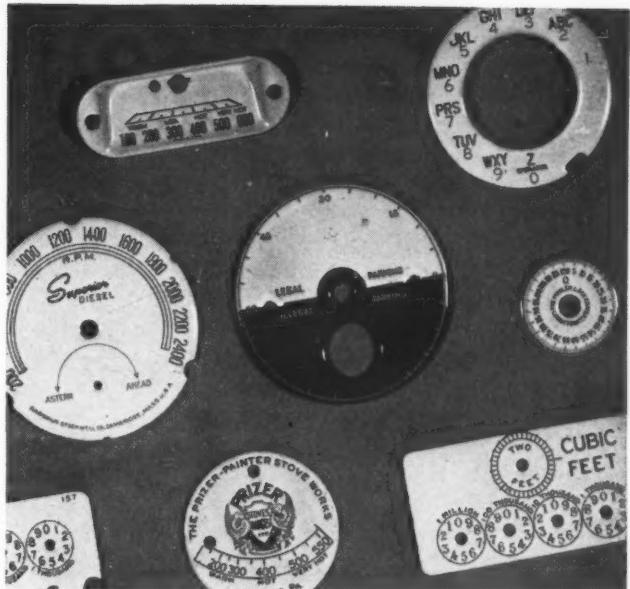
Imprinted dials utilizing vitreous enamel surfaces
